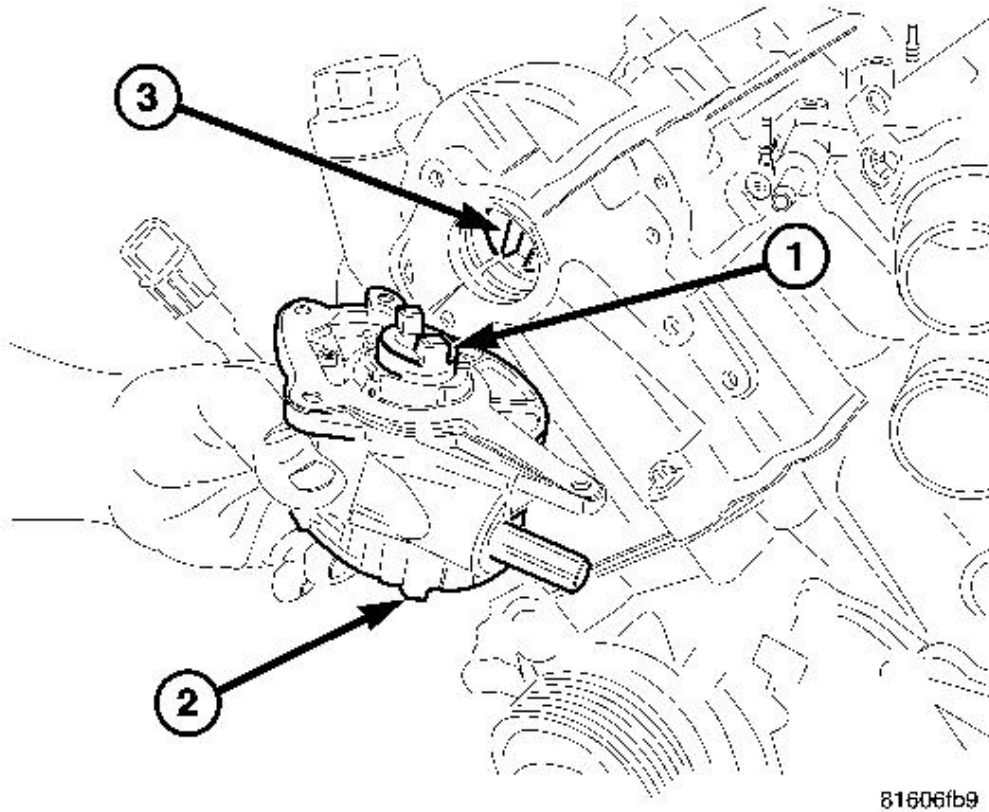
Vacuum Pump Gear, Vacuum Pump & Right Intake Camshaft Drive Gear
